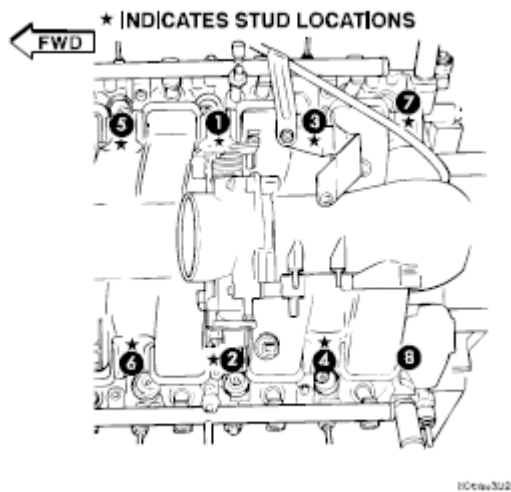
Identifying Removal & Installation Sequence Of Intake Manifold Retaining Bolts
